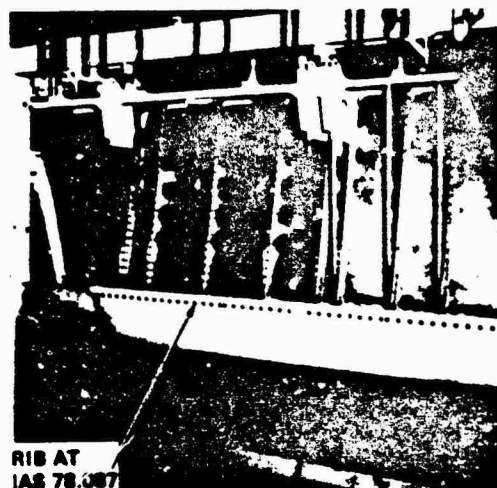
NASA L-1011 composite inboard aileron with lower covers removed
